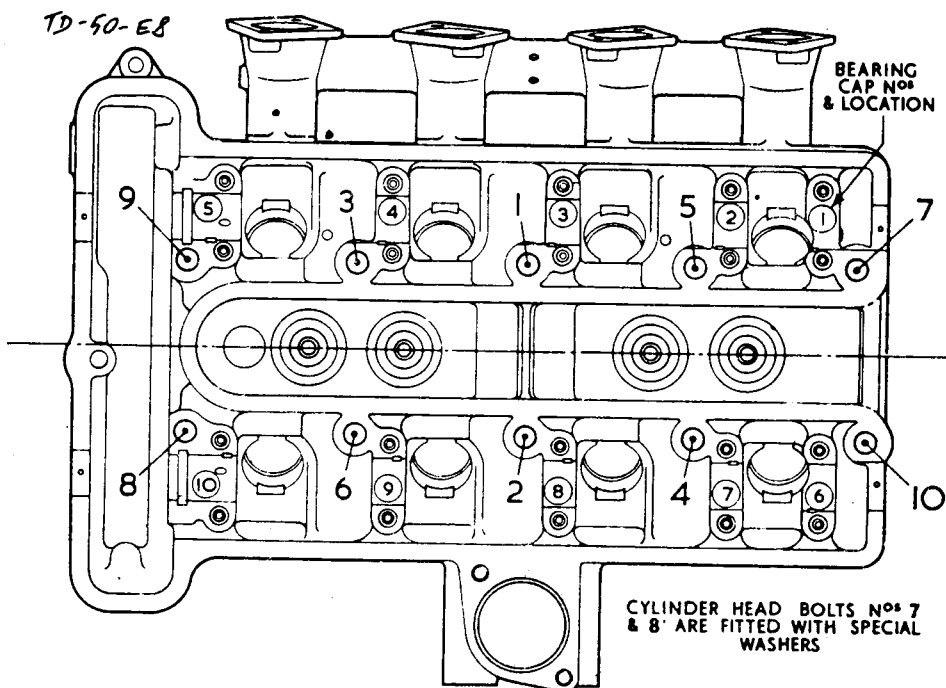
ORDER OF TIGHTENING HEAD BOLTS
